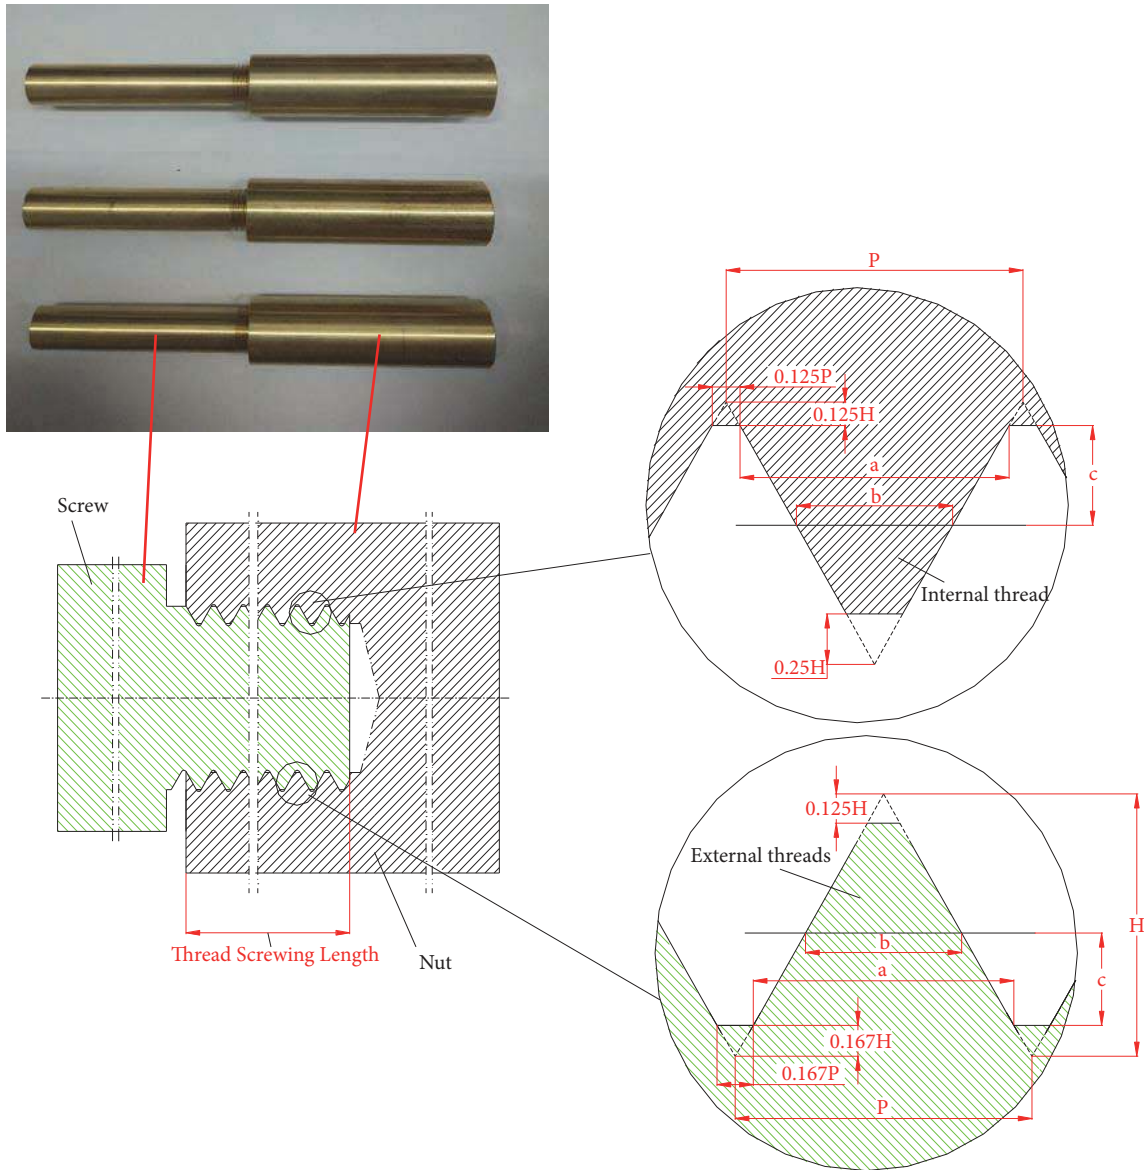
Part of experimental threaded connection samples and ISO internal thread and ISO external thread.
